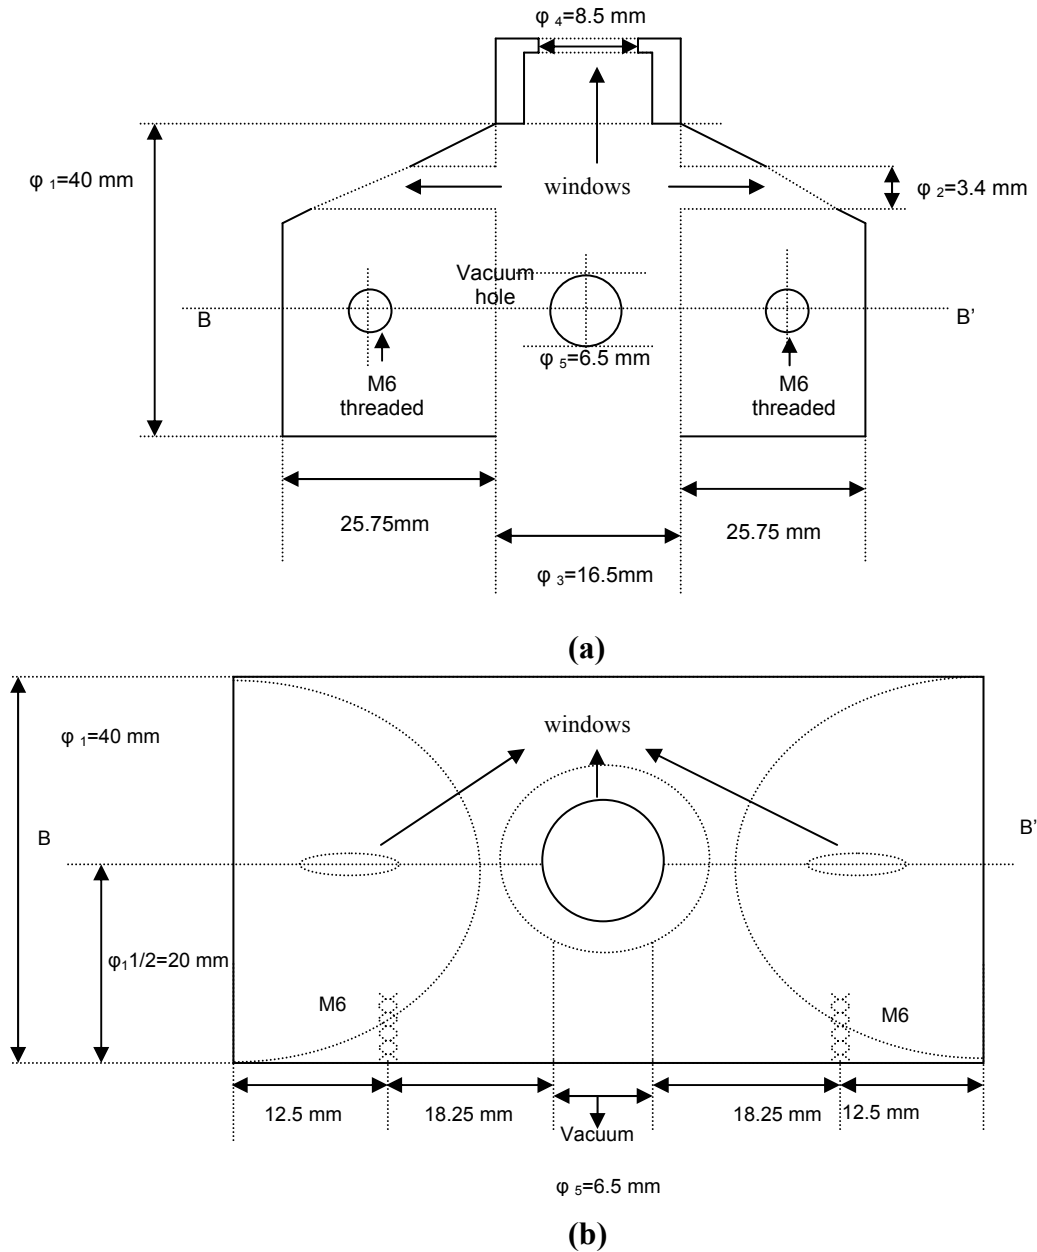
(a) Drawing of the vacuum chamber and (b) side view B-B' of drawing (a). φ_1 , φ_2 , φ_3 , φ_4 , φ_5 are the diameters of the vacuum chamber, laser cavity windows, hole for sealed glass that holds the cold finger, luminescence window, and vacuum hole, respectively. M6 threads are for posts. They are perpendicular to the optic axis.
